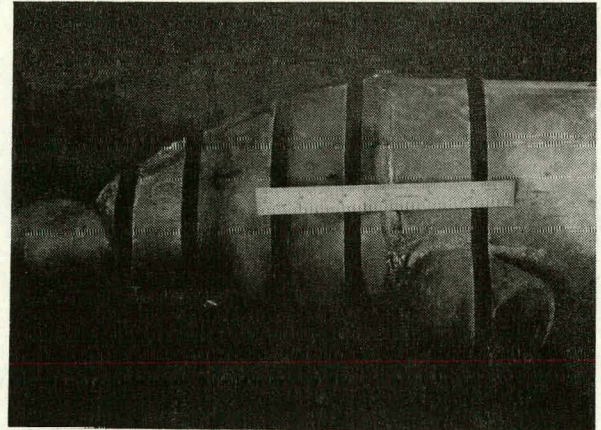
Demonstration of Arc Saw Cutting Irregularly Shaped Pieces
